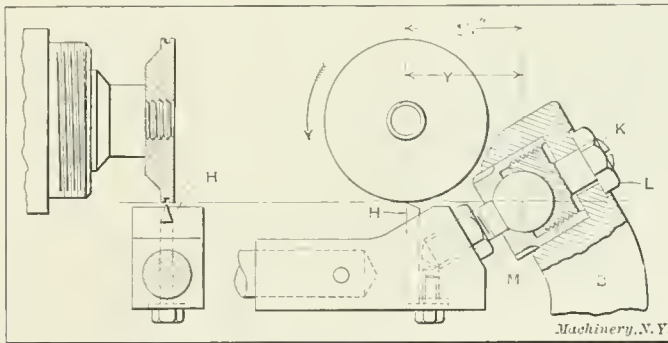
Enlarged View showing Construction of the Socket Joint—Scale One-half Actual Size
